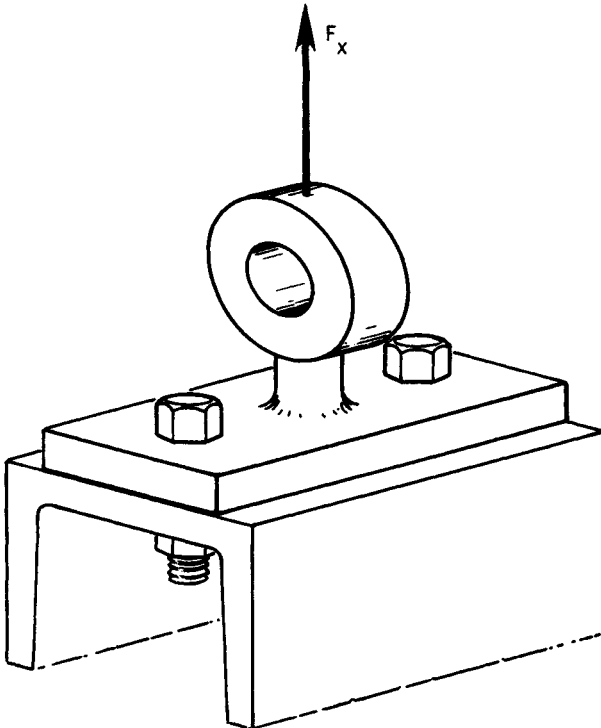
Joint loaded in tension. This is the joint analyzed in the text. The bolts used here are those shown in Fig. 22.10.
